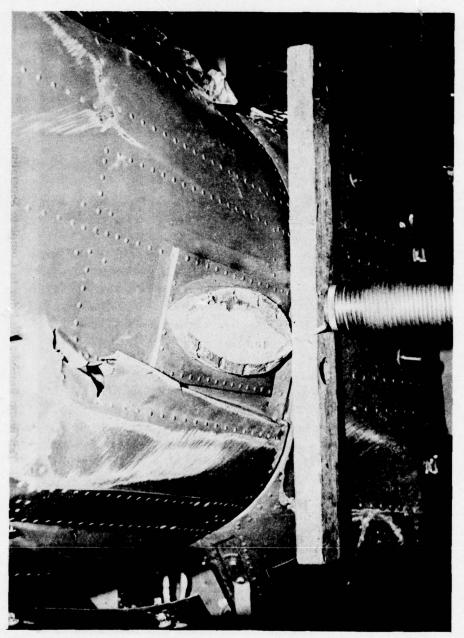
Photo E. Structural Damage to Tail Boom at Dummy ARC-114 Location.
